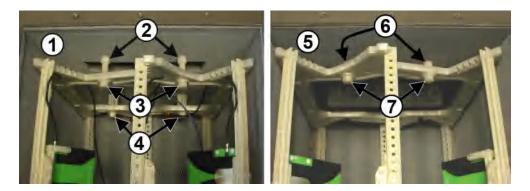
Left: remove two long bolts (3) at the rear wall inside the chamber. Right: remove two short bolts (7) at the front wall
